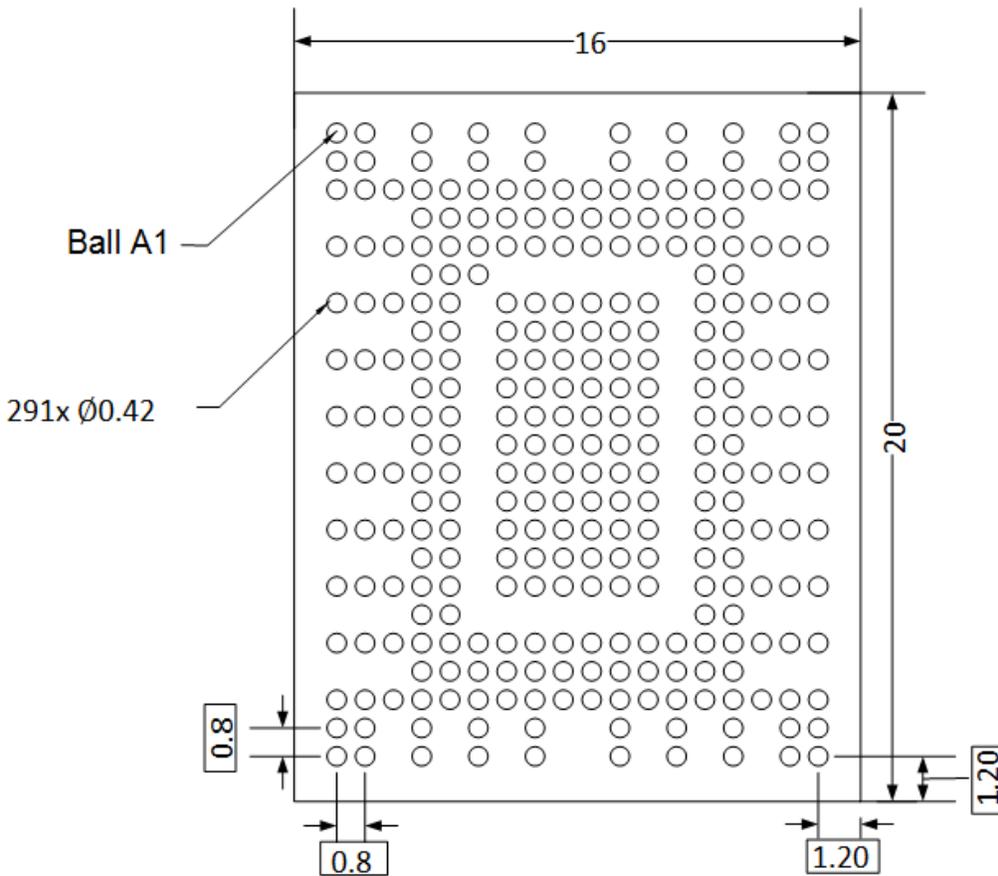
Recommended Land Pattern for M.2 Type 1620 BGA (Top View)
